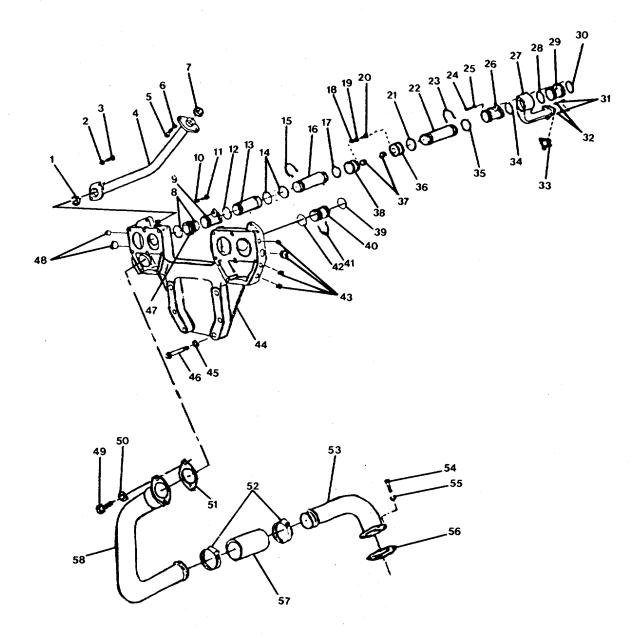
Thermostat Housing Support/Water Transfer Tube Group.
